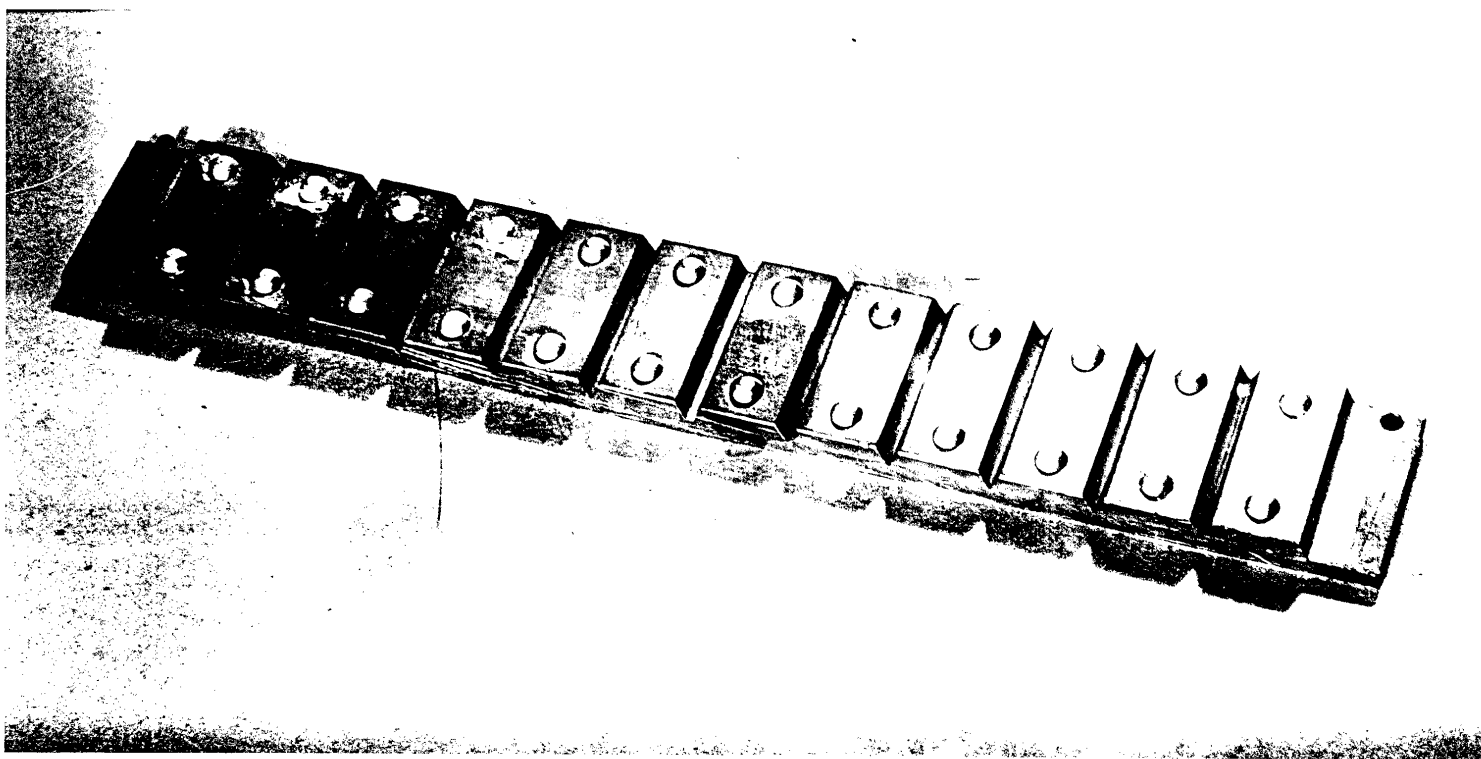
MOLD FOR CASTING PLASTISOL FORM
